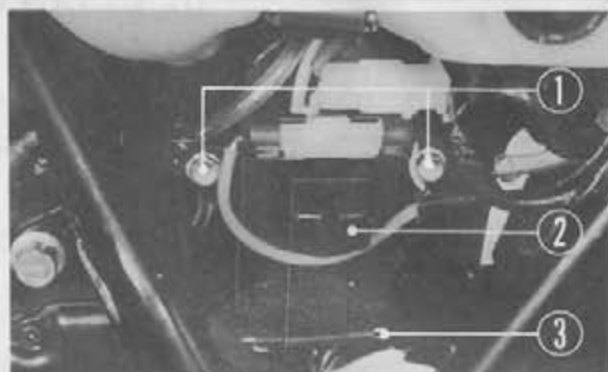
① 6mm bolts ③ Cotter pin
